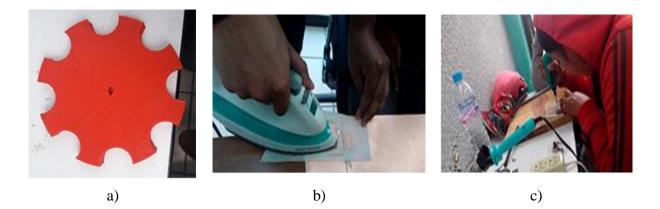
a) Printed rim. b) Ironing of Printed c) Circuit drilling
